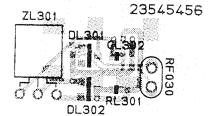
U0015 F-REM PC Board (Bottom Side)
